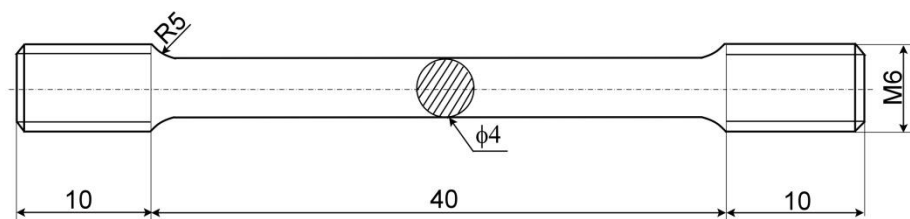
Cylindrical tensile test specimens (all dimensions are in mm).
